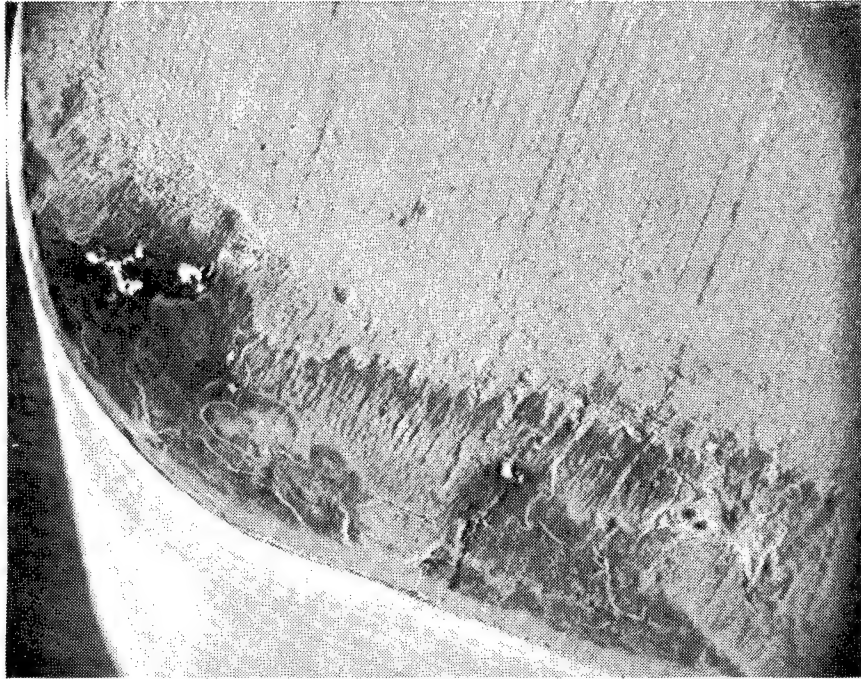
SEM Photograph (76X) of Fluid #4's Milling Test Tool 4-M-4 After Machining 5.1 Cubic Inches of Material.
